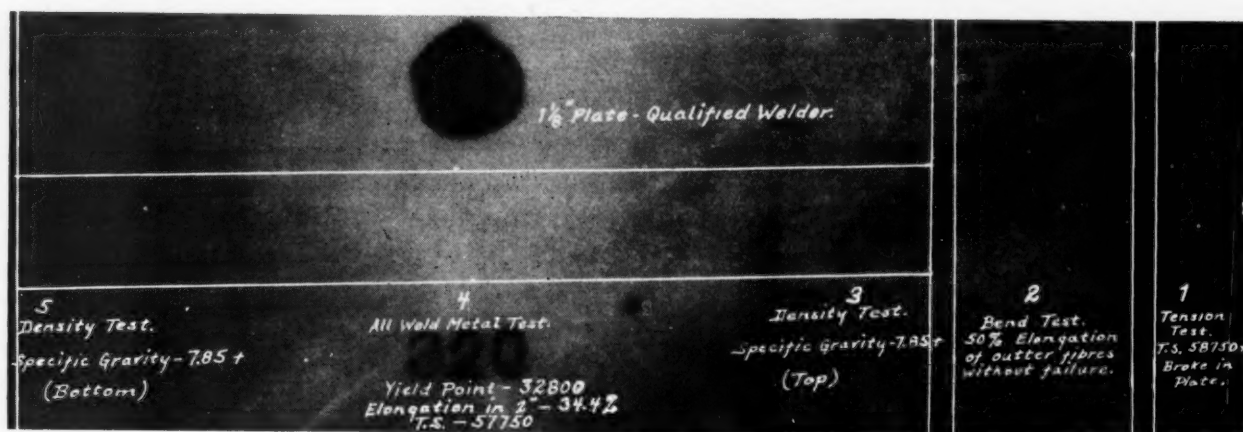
Radiograph of a 1 1/2 inch plate weld made by a qualified welder. This sample plate was attached to and welded continuously with a longitudinal weld of a boiler drum.
